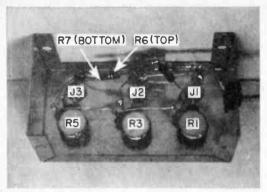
With the bottom cover removed, the simple wiring and facile parts placement becomes obvious.
